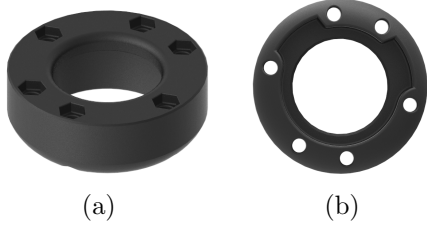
Webcam camera Cover, isometric view (a) and bottom view (b)
